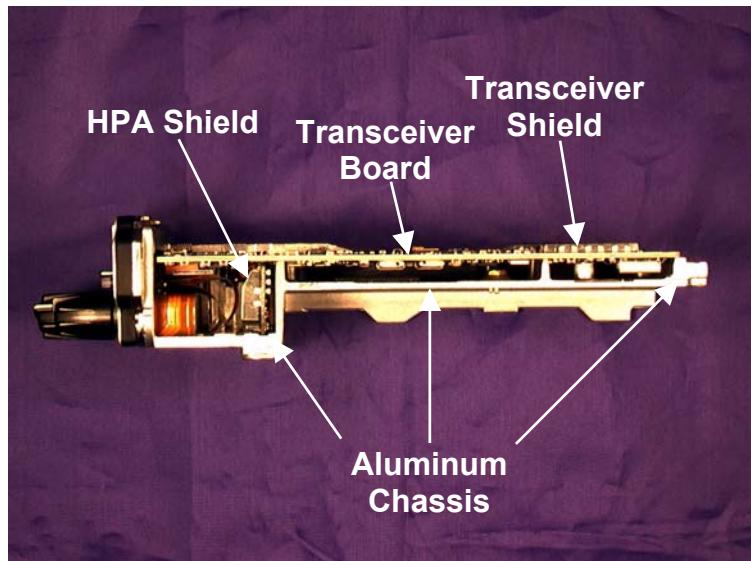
BV8P801T Cross-Section Photograph (Keypad and PK Board Removed)
